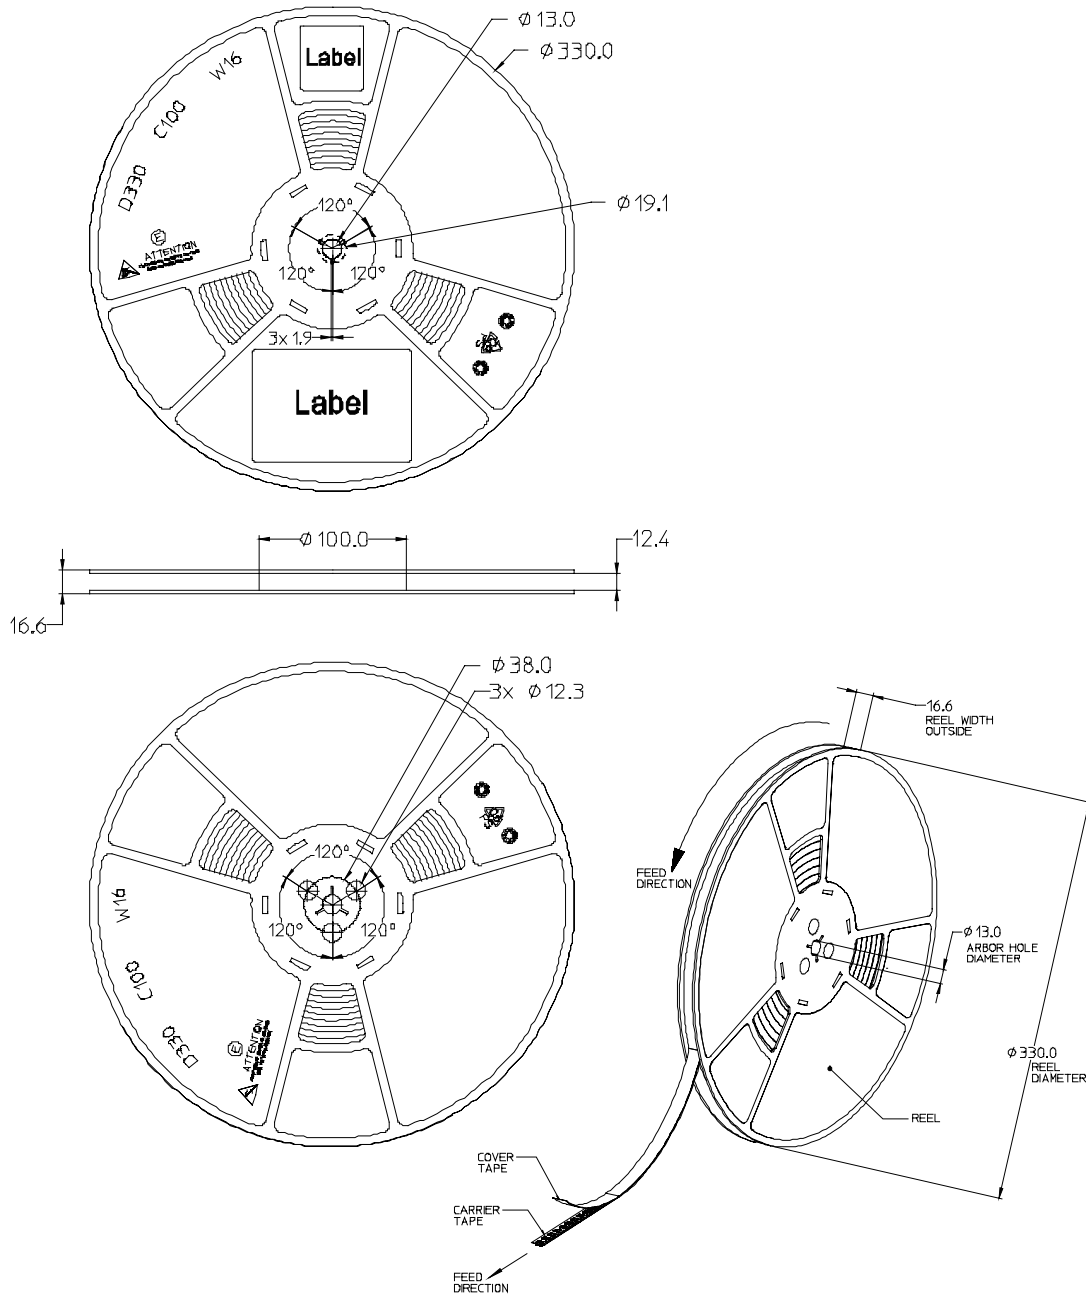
Reel dimensions for LUXEON Rebel Color Line.
